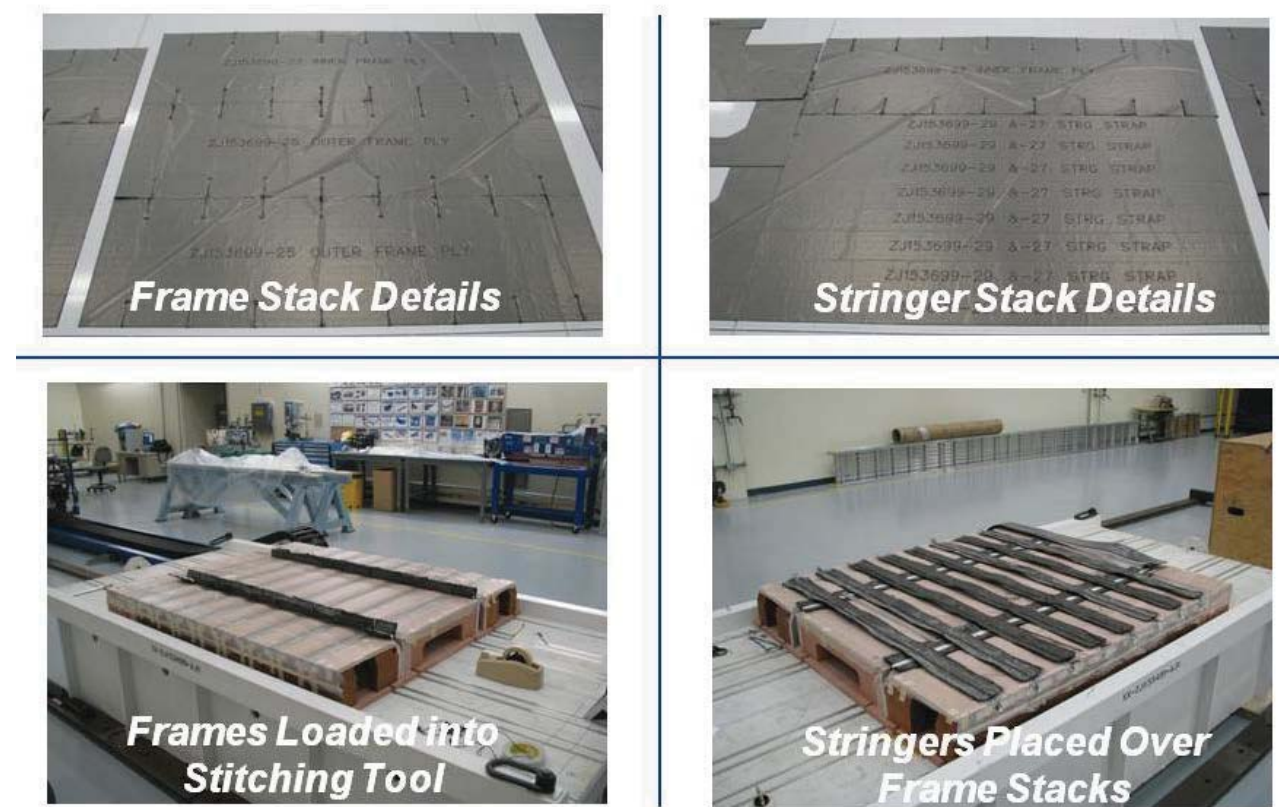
STRINGER AND FRAME DETAILS INSERTED INTO PREFORM
